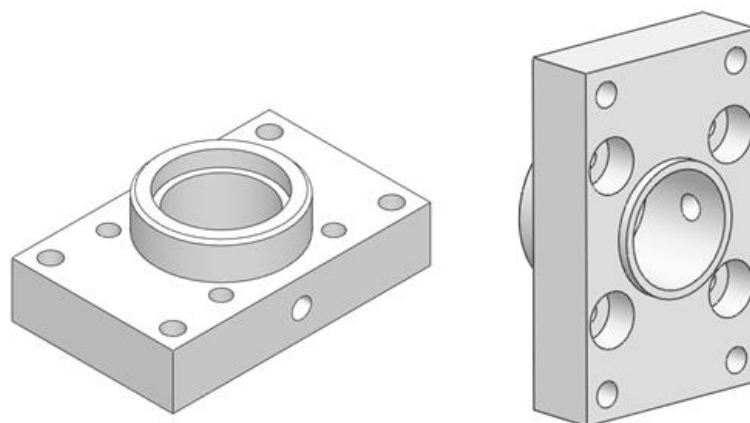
Rectangular shaped fitting connection (A.O.P.)
